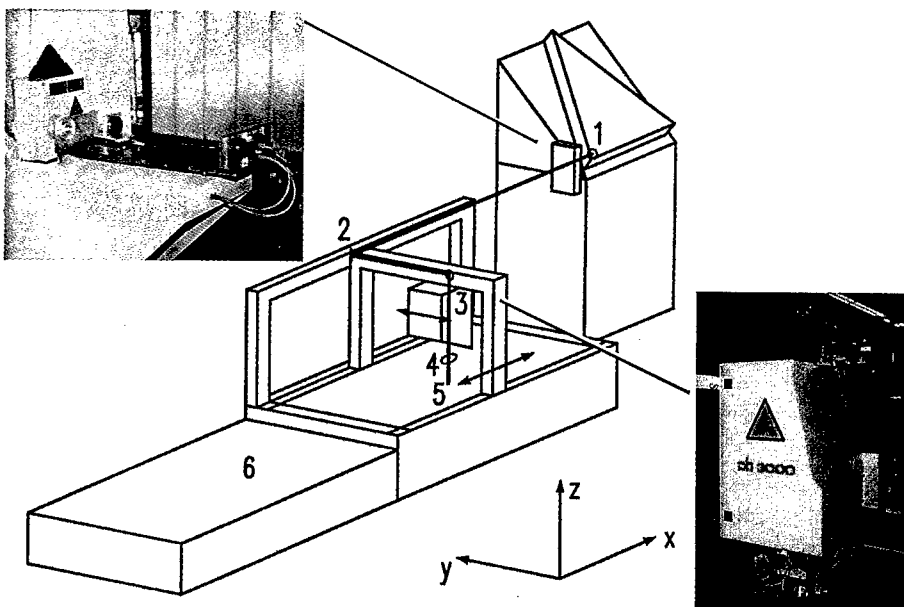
upper left corner: adaptive telescope; lower right corner: delta housing for the second adaptive optic; 1 Laser, 2 x-axis, 3 y-axis, 4 z-axis, 5 upper working table, 6 lower working table
